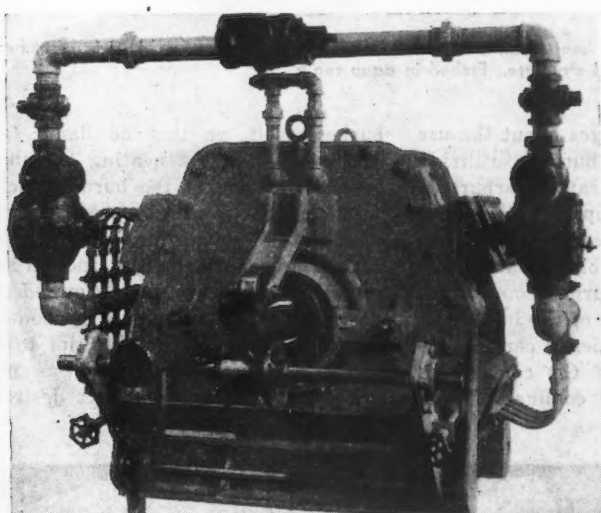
A—Doughnut spray for continuous quenching of welded steel tubing, 3½-in. diameter. Production is about 180 lb. per hr.
